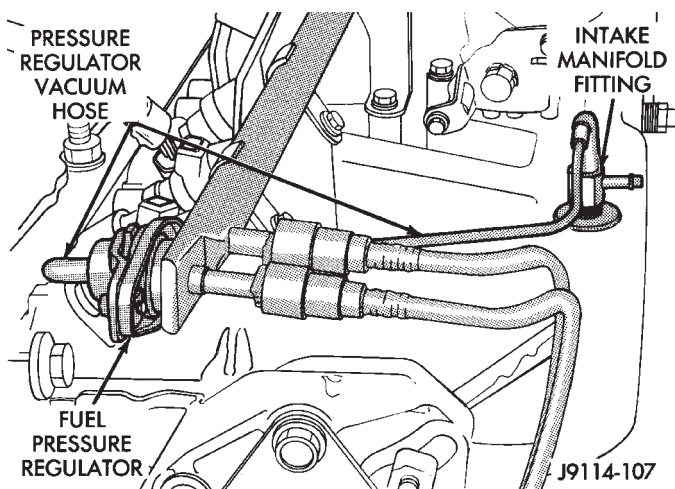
Pressure Regulator Vacuum Hose—4.0L Engine
